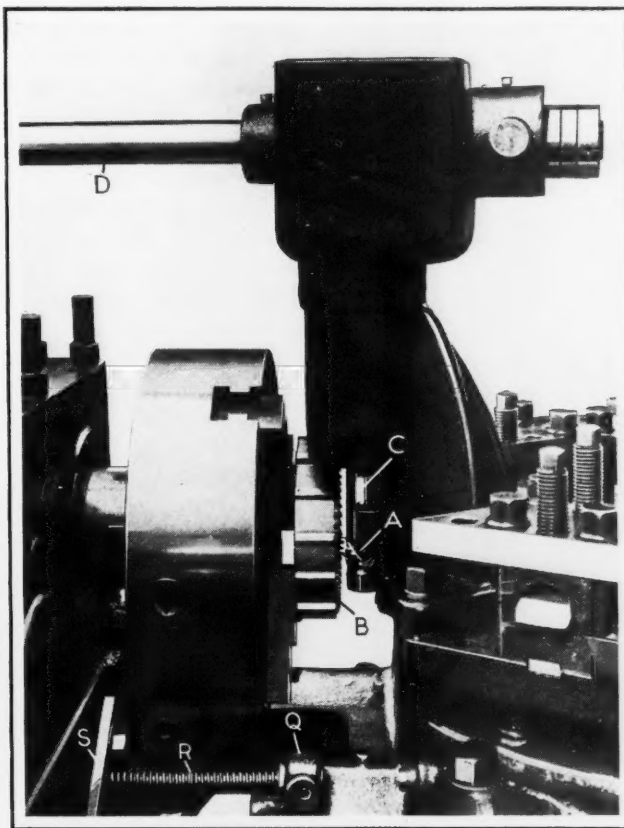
Turret Lathe Equipped for Cutting Teeth of Special Crown Gear
